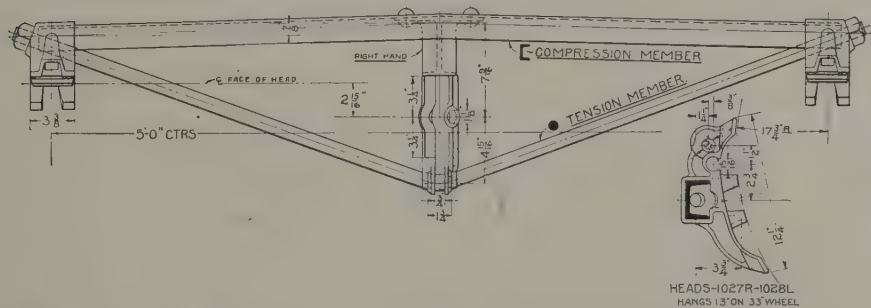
Drexel M. C. B. No. 1 Freight Brake Beam with Riveted Strut.
